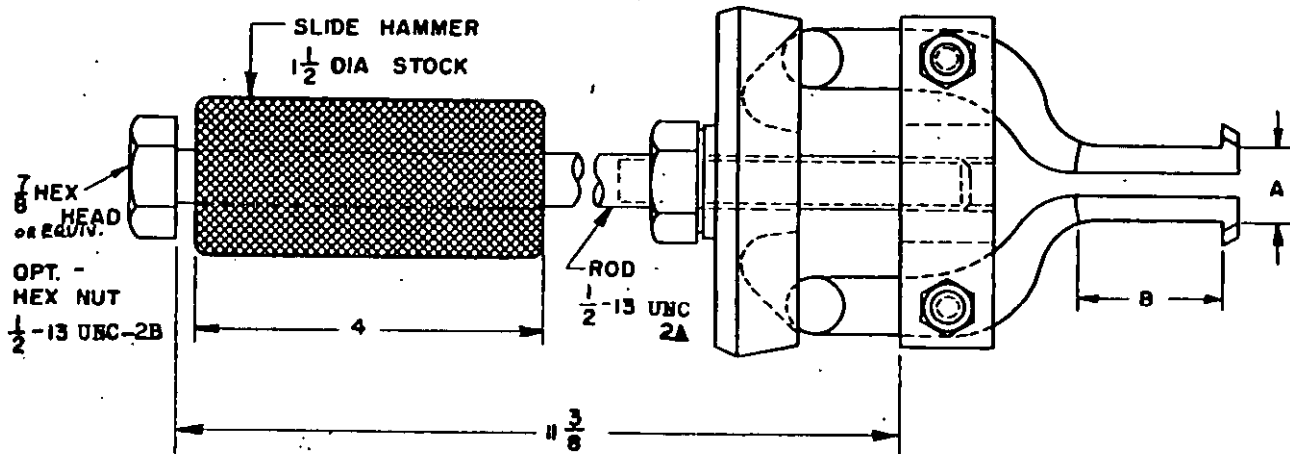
Type III, class 1, puller, mechanical, slide hammer, bearing, two-jaw, internal.
